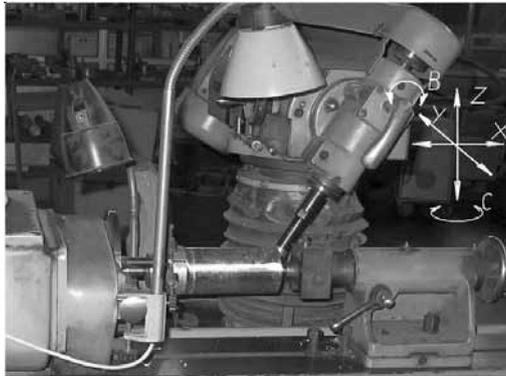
Adaptation of lathe grinder for machining tests with rotating disc. Linear and rotary axis movements are drawn in the picture
